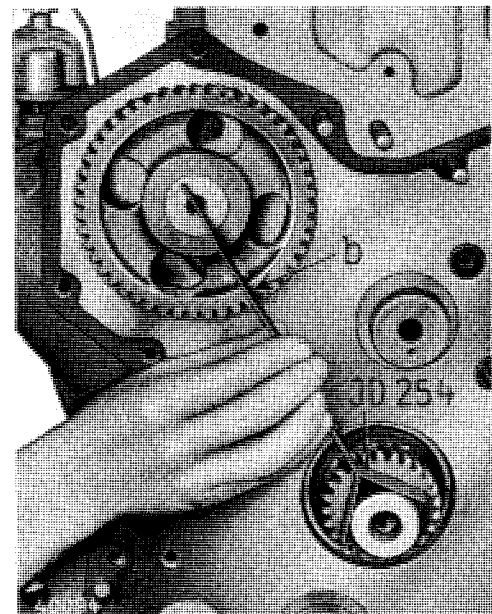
Timing Camshaft Gear by means of Timing Tool No. JD 254
